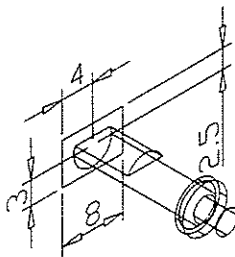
Second sketch extruded to cut, third sketch constructed
